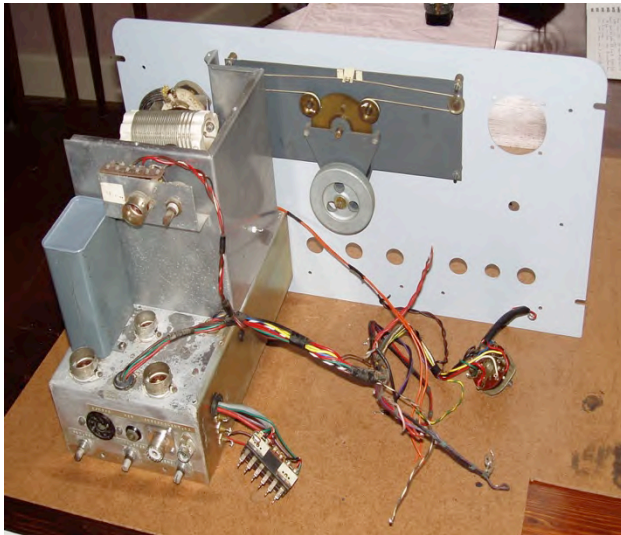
Reassembly: the painted panel, the Eddystone dial refitted, and the PA chassis cleaned and replaced.
